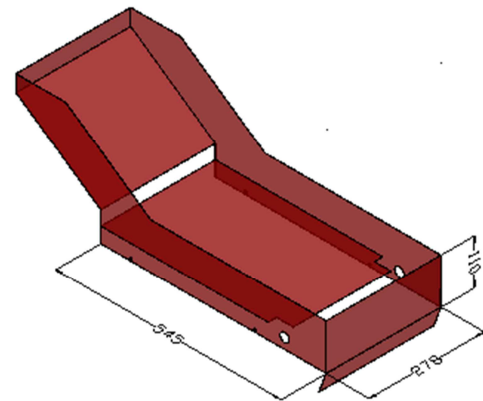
Design Shape and Dimension of Casing Auto Feeder
